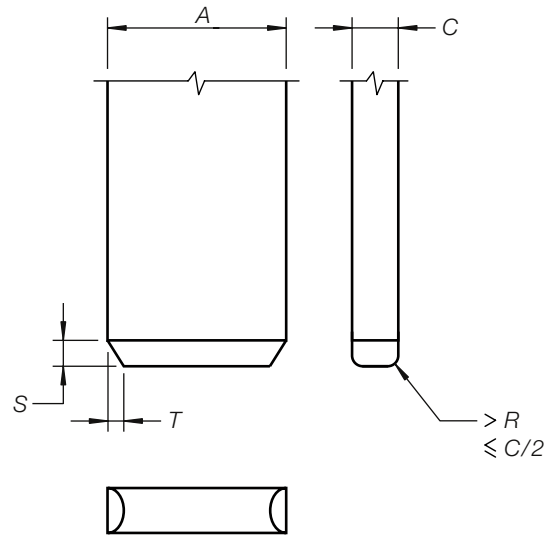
(in part) DIMENSIONS OF PLUGS
